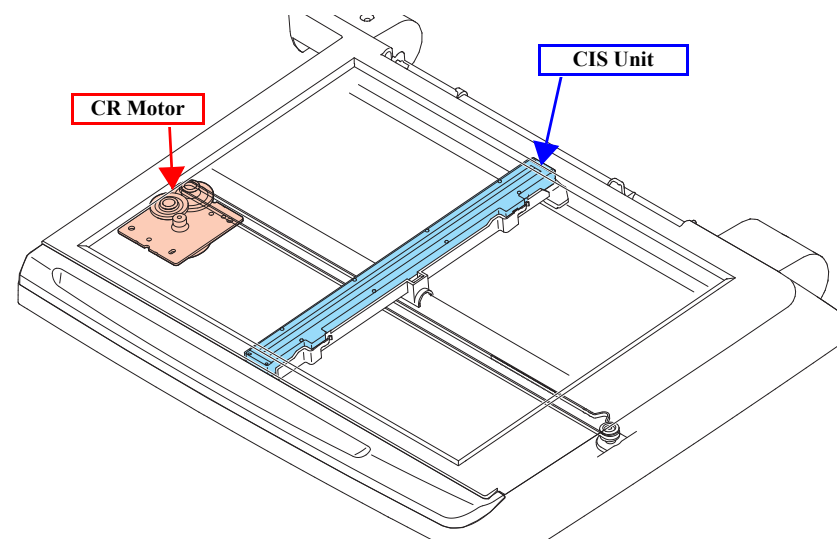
CIS Unit and CR Motor in Scanner Mechanism
